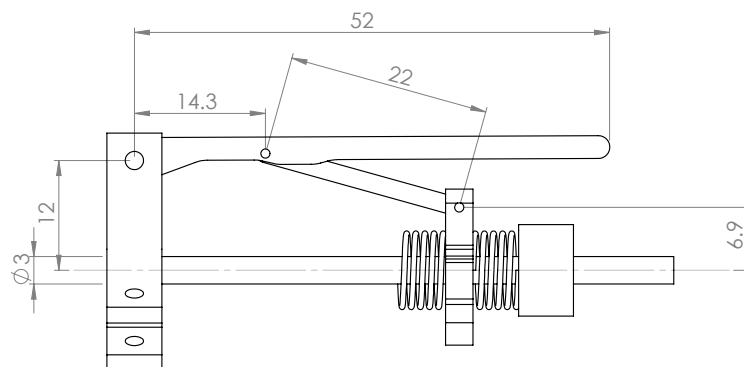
Clamping mechanism inside a module, measurements in mm. The 3mm shaft is a lead screw that drives the mechanism.
